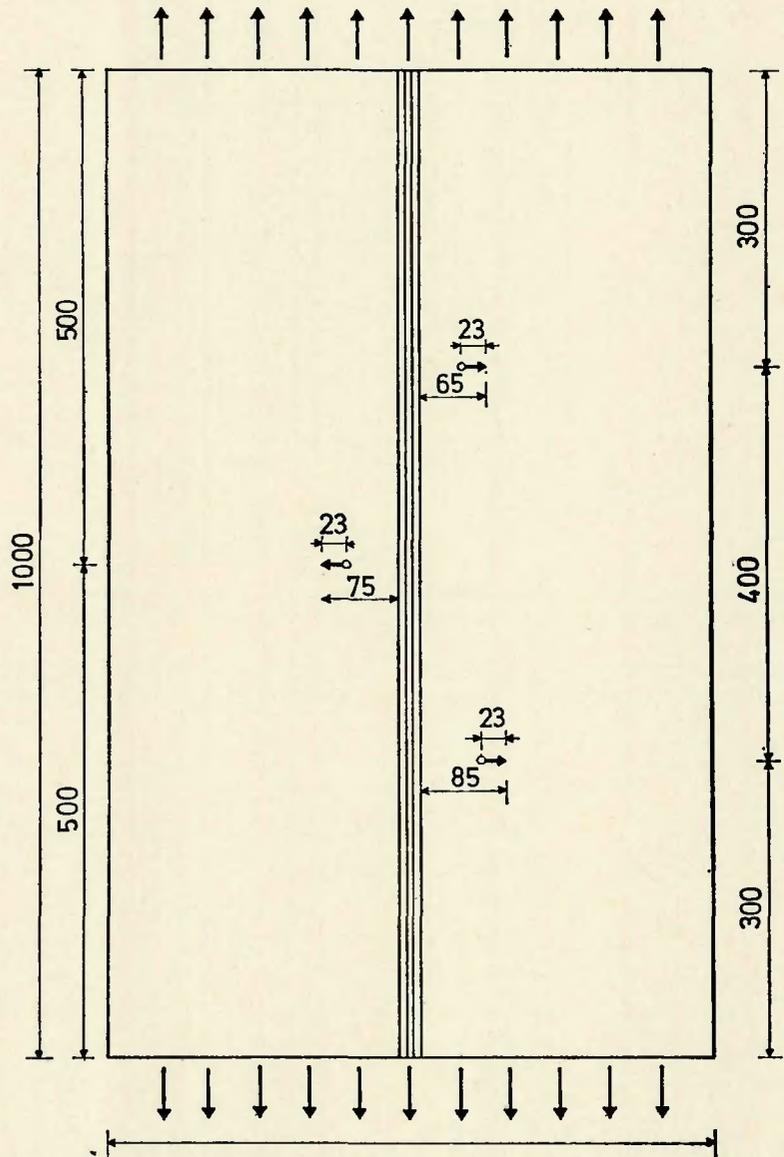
Notch locations in one-run weld plates. Dimensions in mm
